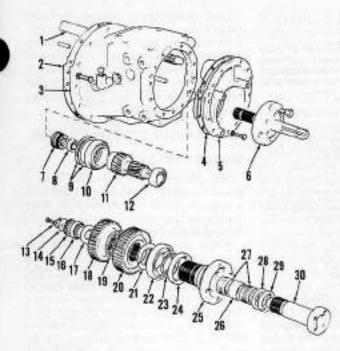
Exploded view of reversible shaft pto assembly showing component parts and their relative positions.
